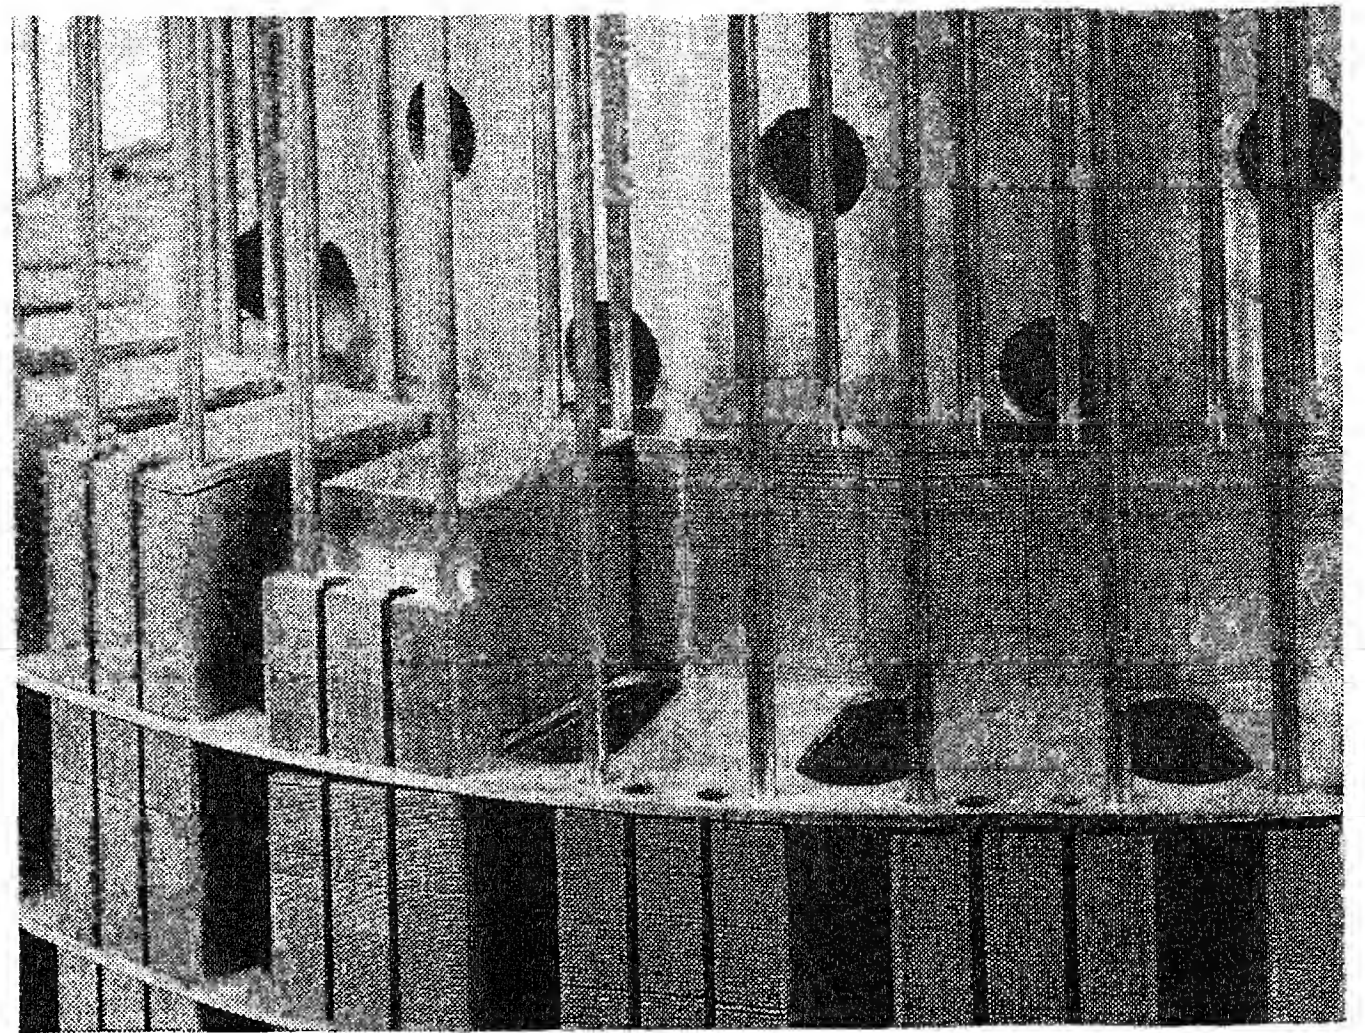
75-kva 28-pole 400-cycle rotor magnet assembly, partially stacked, showing main drive tube with casting openings, inner magnet ties with loose fit on rivets, magnets in place, and pole shoes tight on the rivets. The nonmagnetic steel retaining disks hold all parts against centrifugal force, see Figure 4
